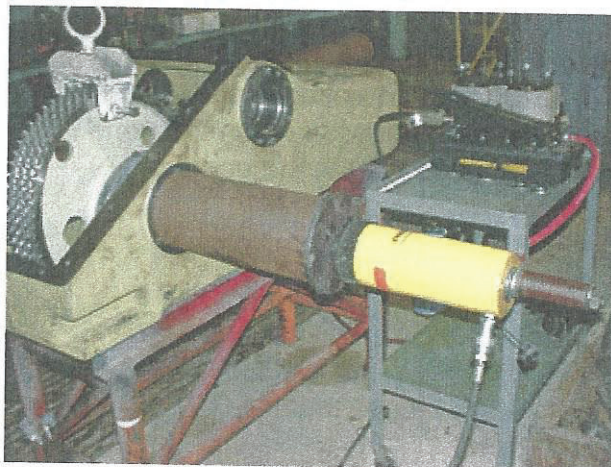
Preparing to pull the eccentric sprocket shaft.
